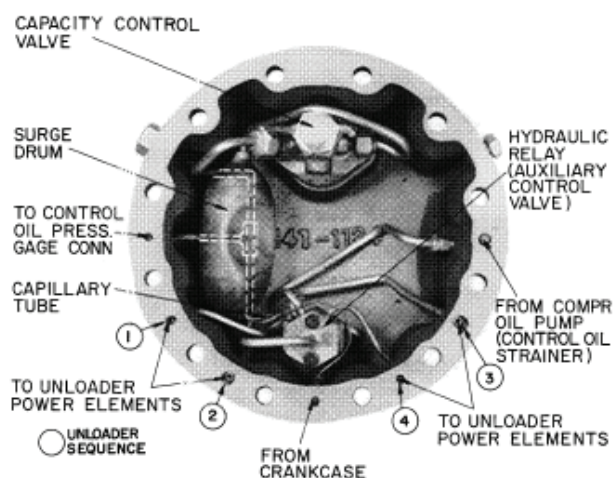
5H Pump-End Cover and Control Assembly (5H40-86)
